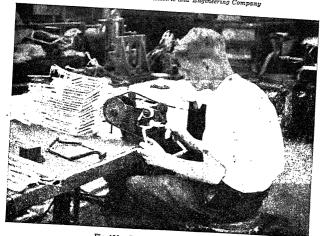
Taping Coils with a Machine Courtesy of the Reliance Electric and Engineering Company
